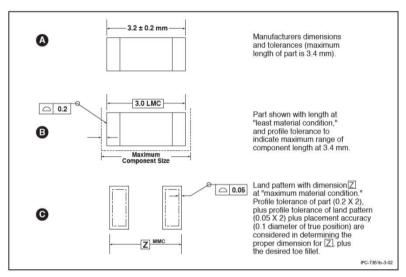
Example of 3216 (1206) Capacitor Dimensioning for Optimum Solder Fillet Condition
